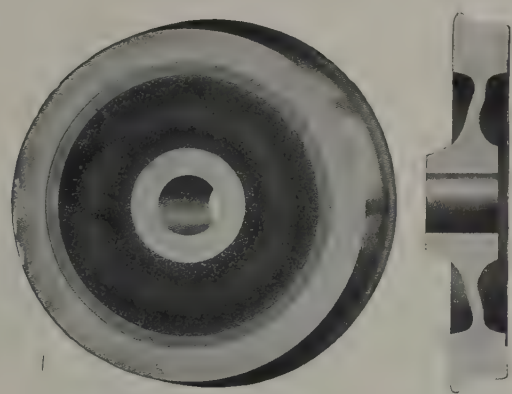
Cast Steel Plate Center with Tire Held by Shrinkage and Shoulder.
